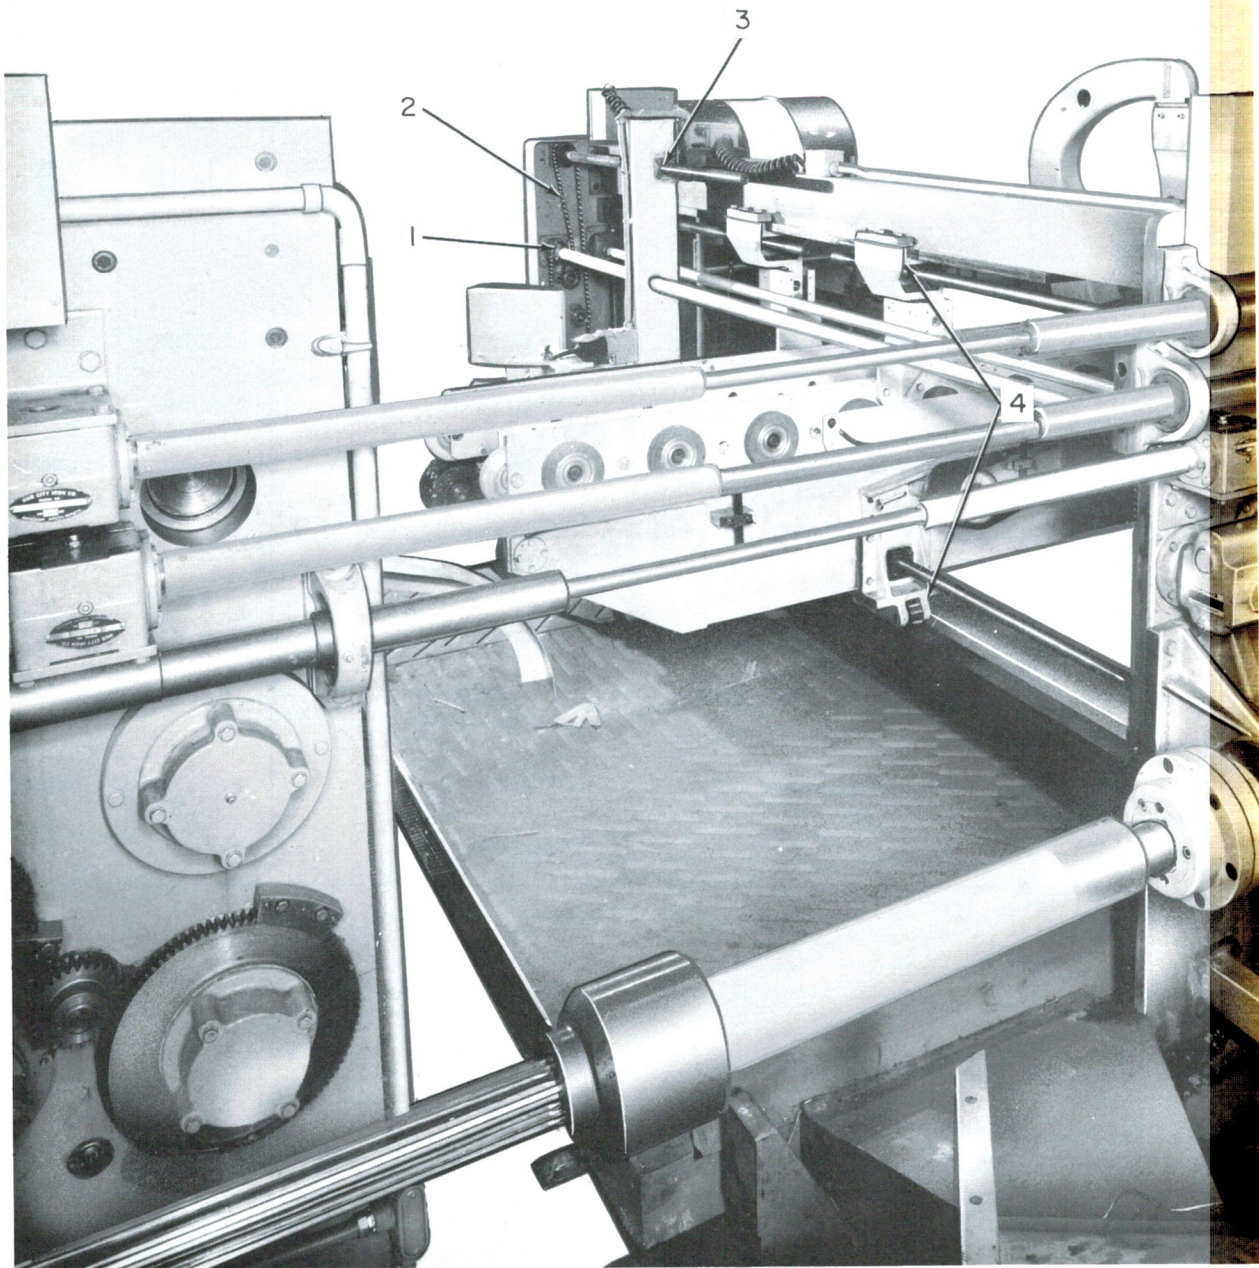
FOLDING SECTION LUBRICATION (VIEW 1)
